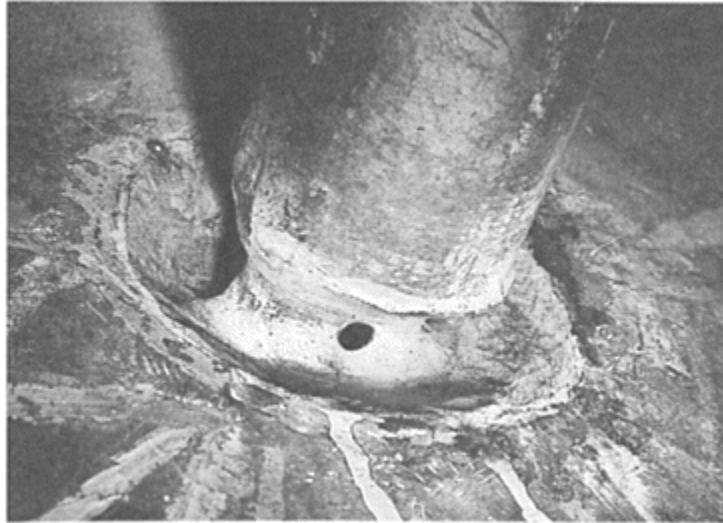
An extreme example of excavation of a 75 mm diameter stub weld to remove slag, detected by ultrasonic testing and trapped above the argon arc root pass.
